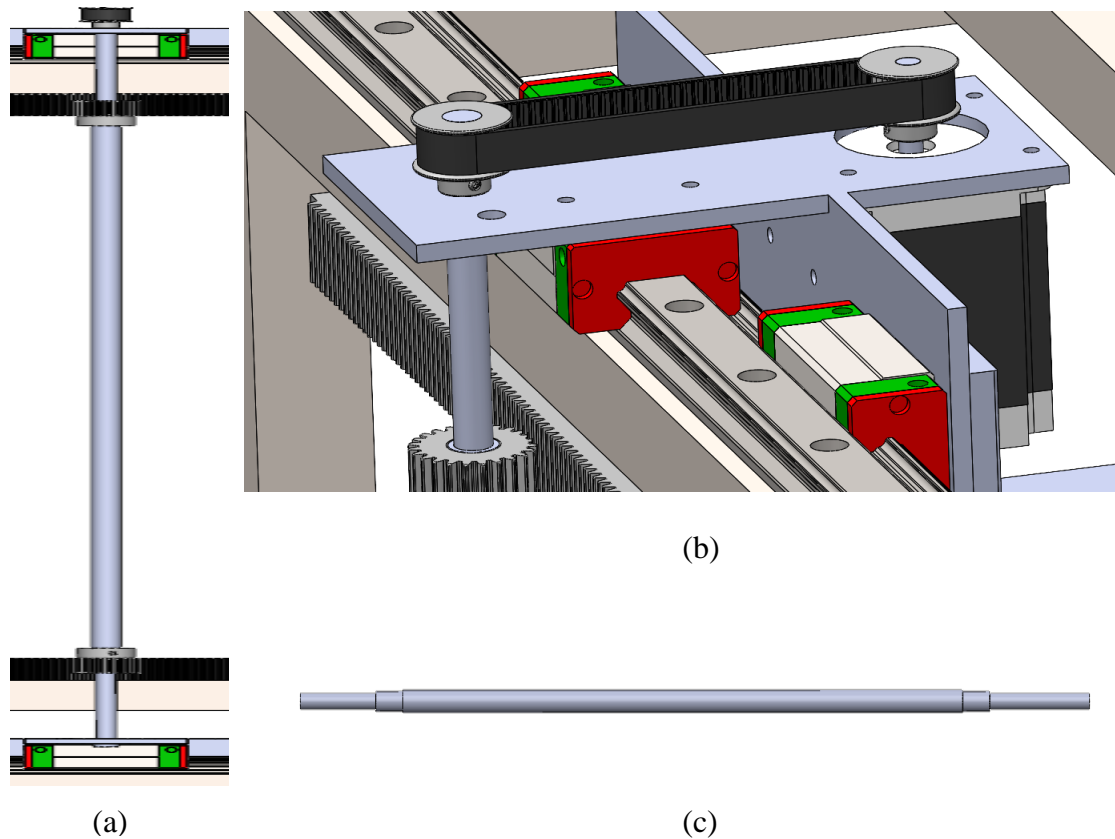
Shaft Design, (a) Front View of Shaft Connections, (b) Connection of Shaft with the Motor, (c) Shaft
